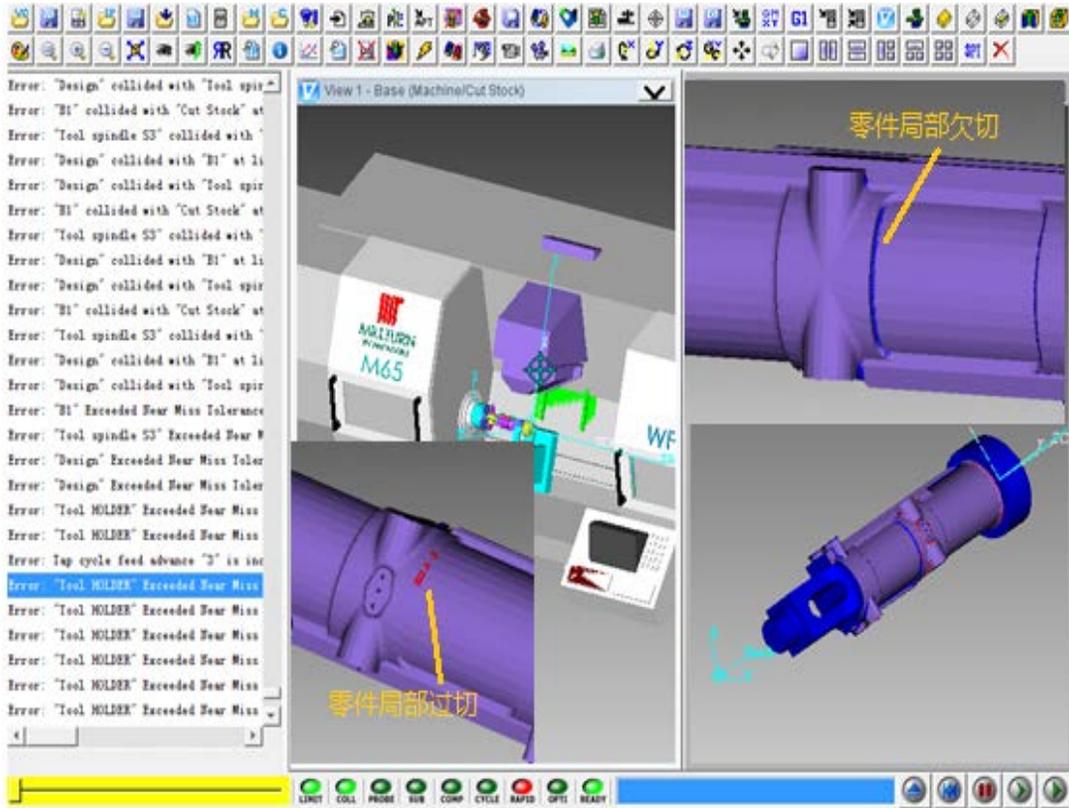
Simulation of over cutting and owe cutting of machining work piece
